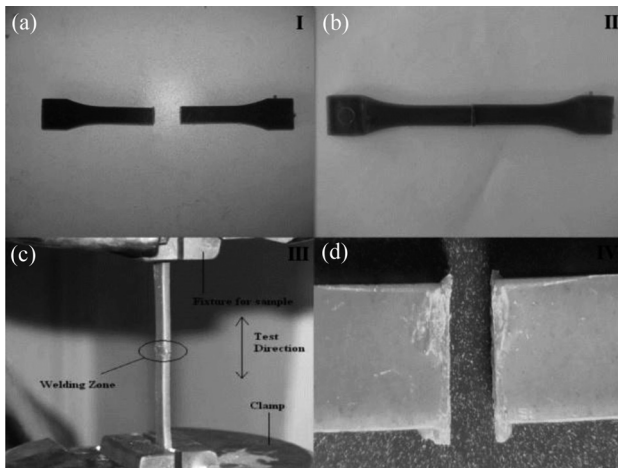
Welding and tensile test procedure of a sample: a) divide injection-molded sample into two parts, b) joint samples by welding, c) tensile testing of welded part, d) failure on welded parts after tensile test
